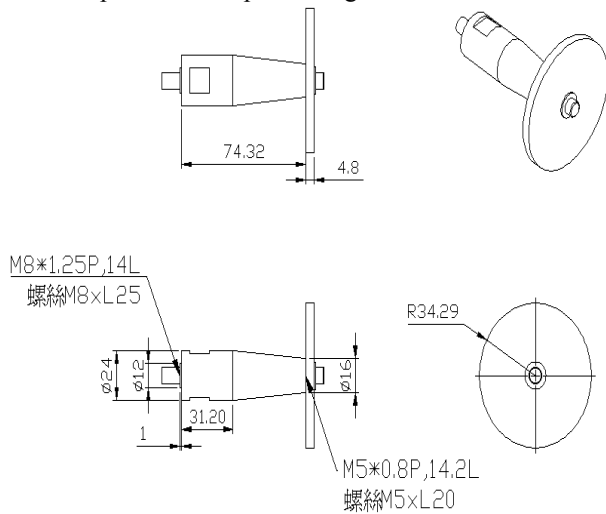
The optimal design engineering drawings of disc-coupled uniform section cone-shaped horn
